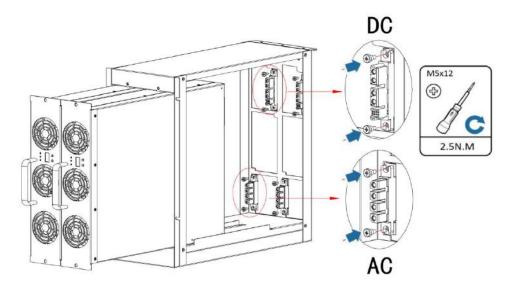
System terminals Installation diagram (modules placed sideways)
